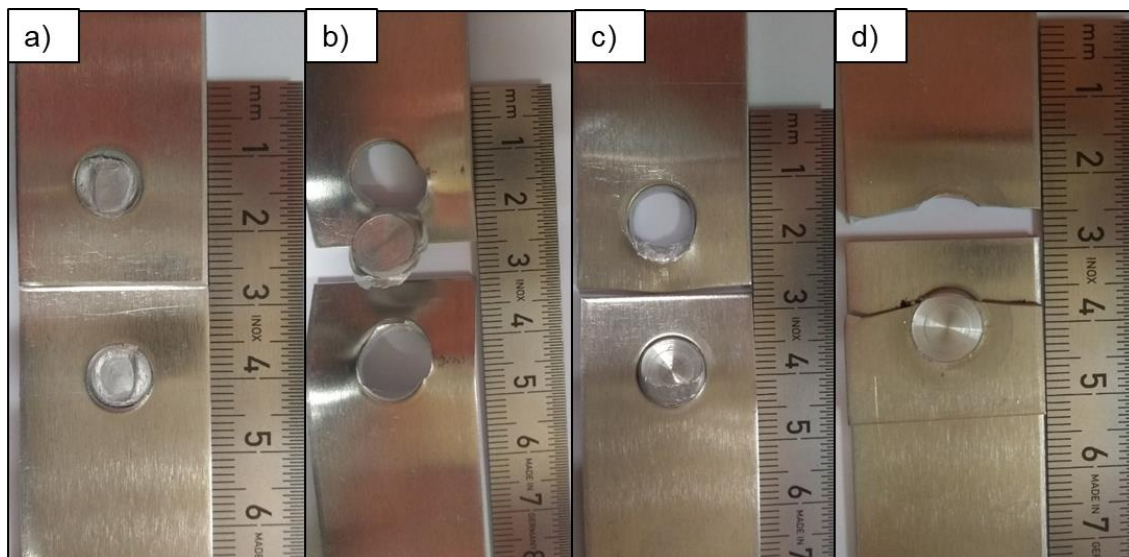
Fracture modes identified during fatigue tests: a) Through the Weld (TW), b) Pull-Out the nugget from both plates (PO1), c) Pull-Out the nugget from only one plate (PO2) and d) Eyebrow fracture (EB).
